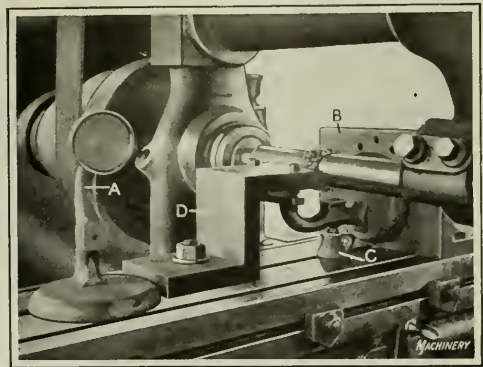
Milling the Pad to which the Table Stem Bearing is attached
